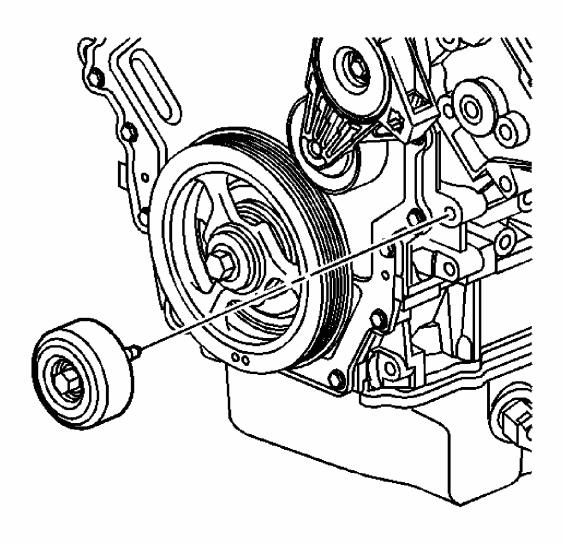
View of Drive Belt Idler Pulley Bolt Courtesy of GENERAL MOTORS CORP.
